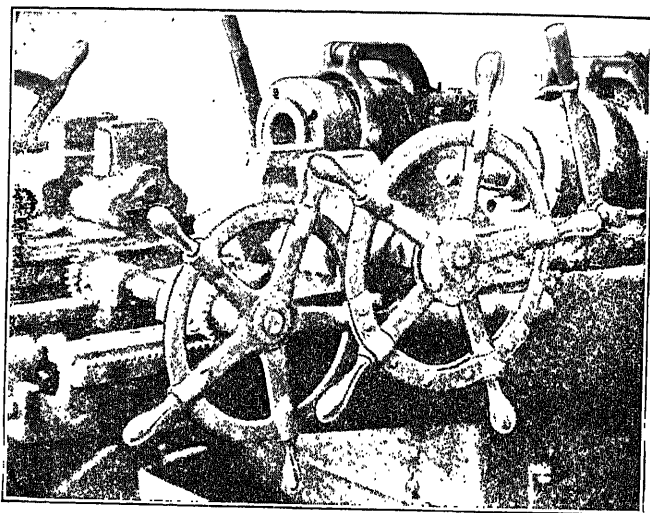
Bolt Threading Machine Made Into a Scarfing Machine.
